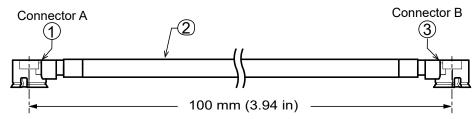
Product Dimensions for the CSG-UFFR-100-UFFR Cable Assembly
